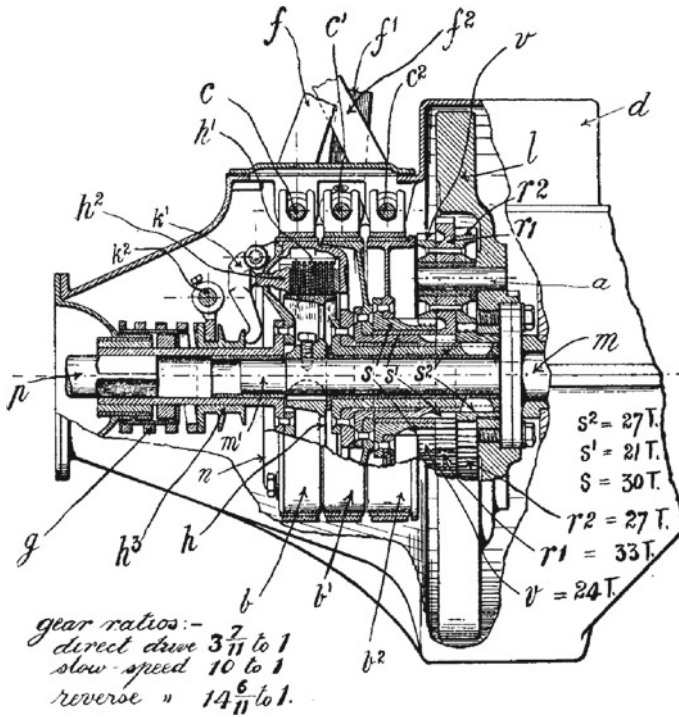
Gearbox of Ford model T of 1908 based on planetary gears. One reverse gear, one reduced forward speed and a direct drive are available (from Genta and Morello 2009)
